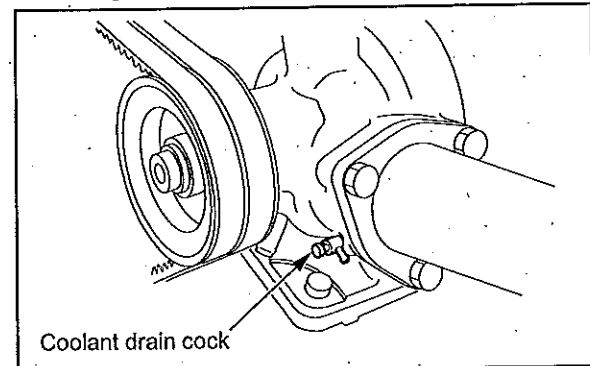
Coolant drain cock (Air cooler water pump)
